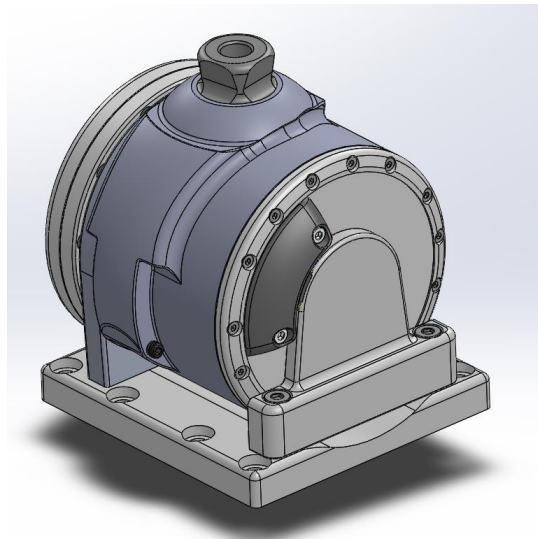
PHP medial attachment piece inserted into the actuator's medial end and screwed into the attachment plate
